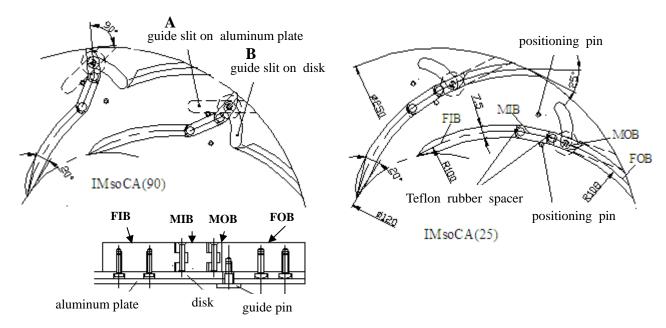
Centrifugal impeller with variable blade outlet angles and mechanism to change angle of impeller blades
